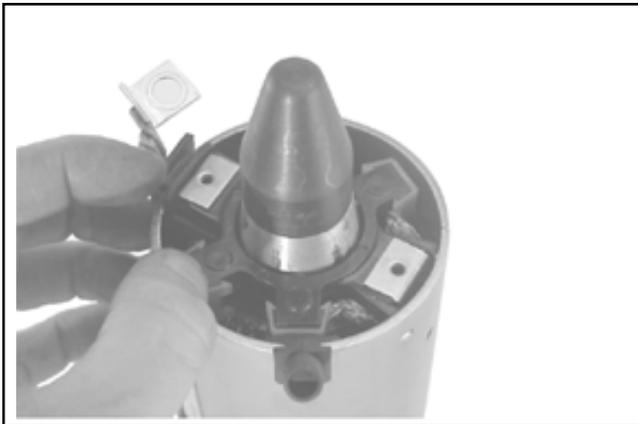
Installing Brush Holder Assembly using Tool with Extension.
